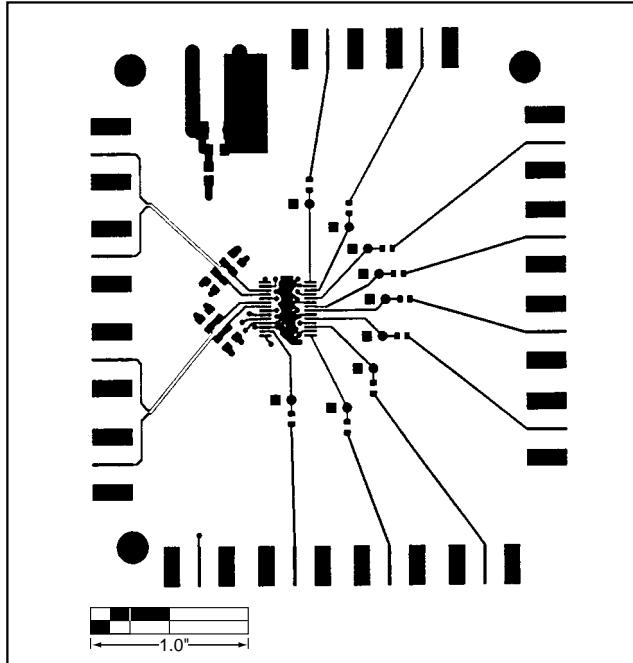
MAX3680 EV Kit PC Board Layout—Component Side
